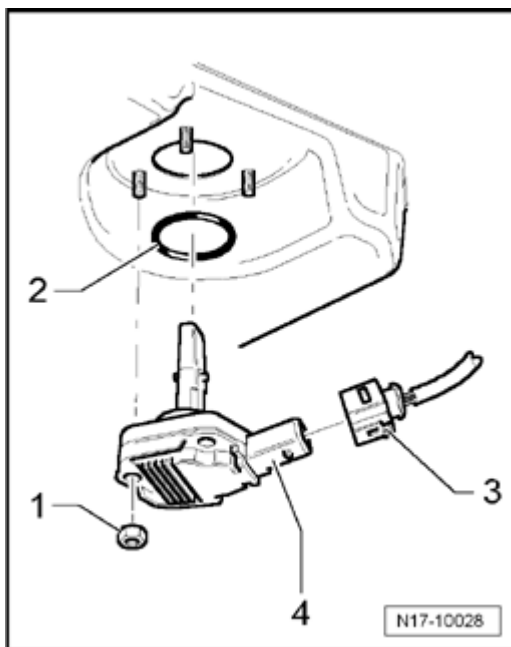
Oil Level Thermal Sensor Remove/Install Components
